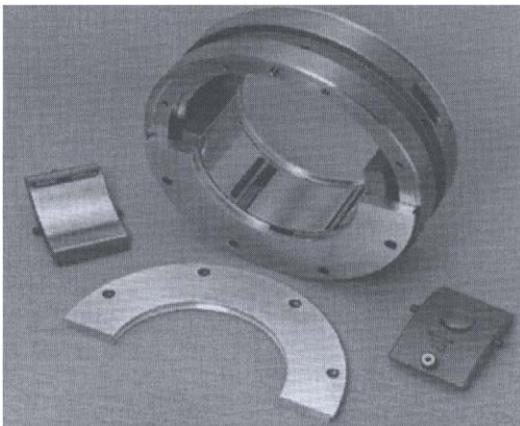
Tilting pad journal bearing assembly (Courtesy of Kingsbury, Inc.)
